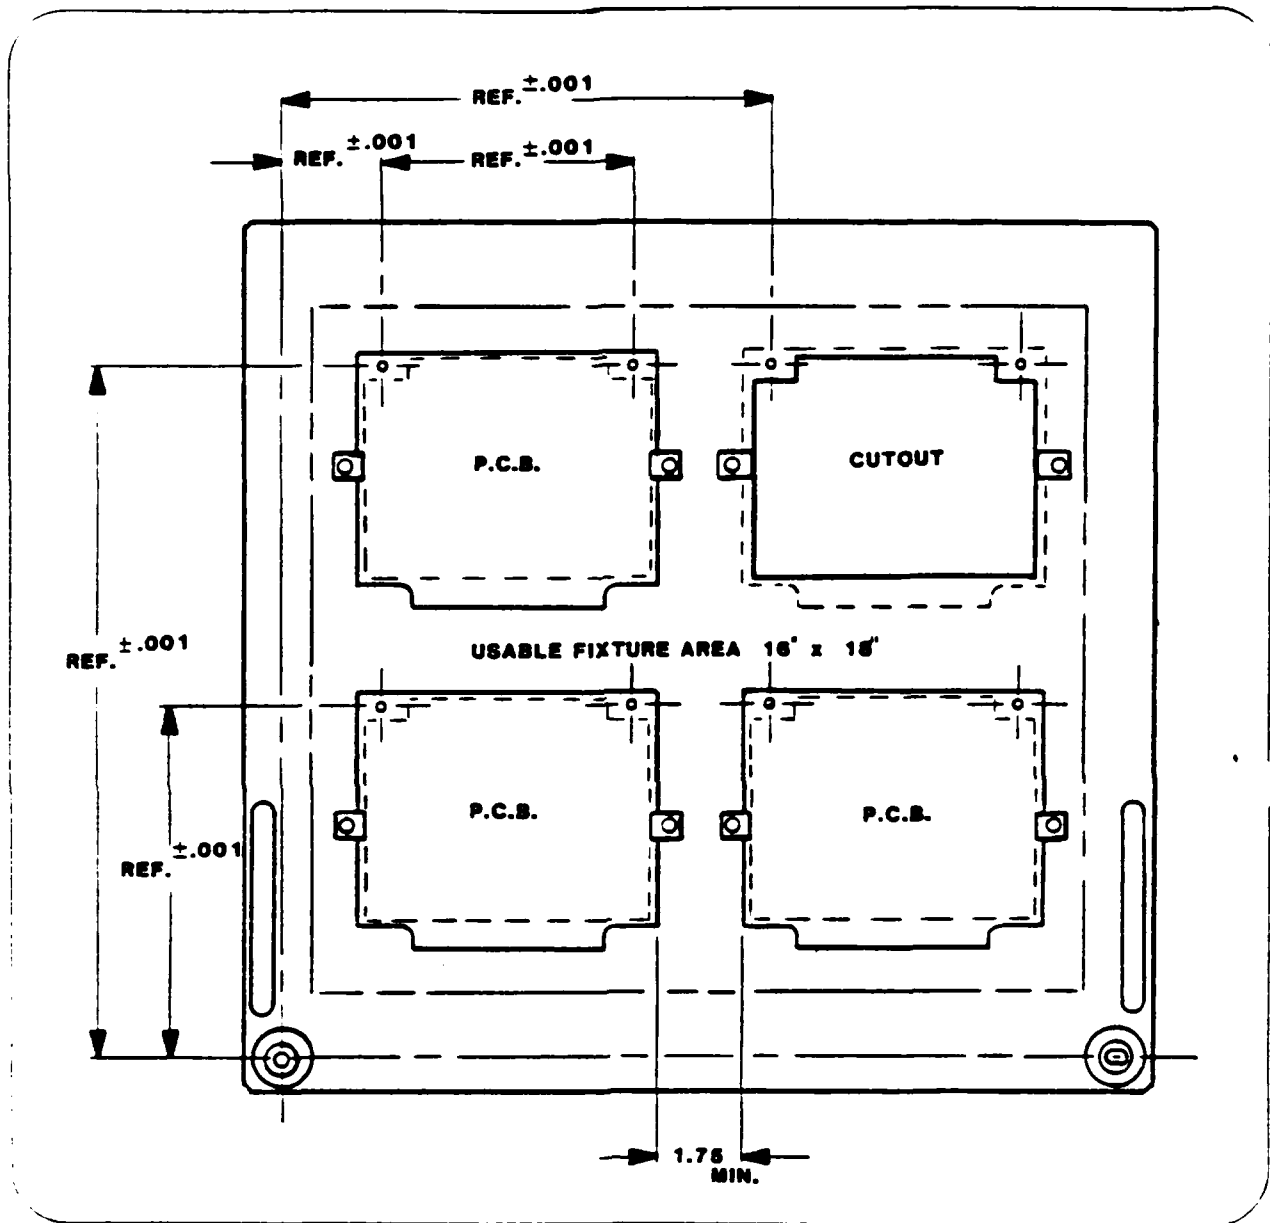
A typical arrangement of PC boards on a Laser/INSPECT fixture, showing an unloaded cutout at the upper right.
